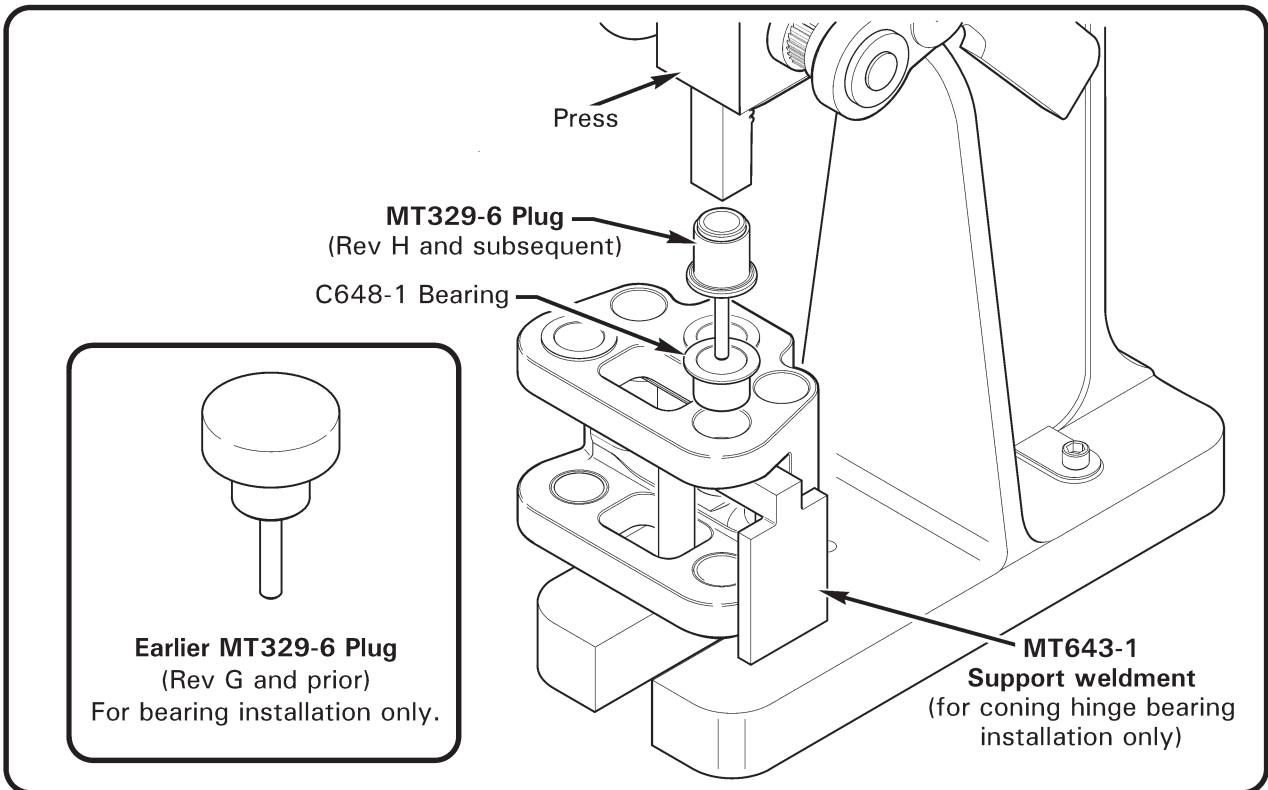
B MAIN ROTOR HUB BEARING INSTALLATION
